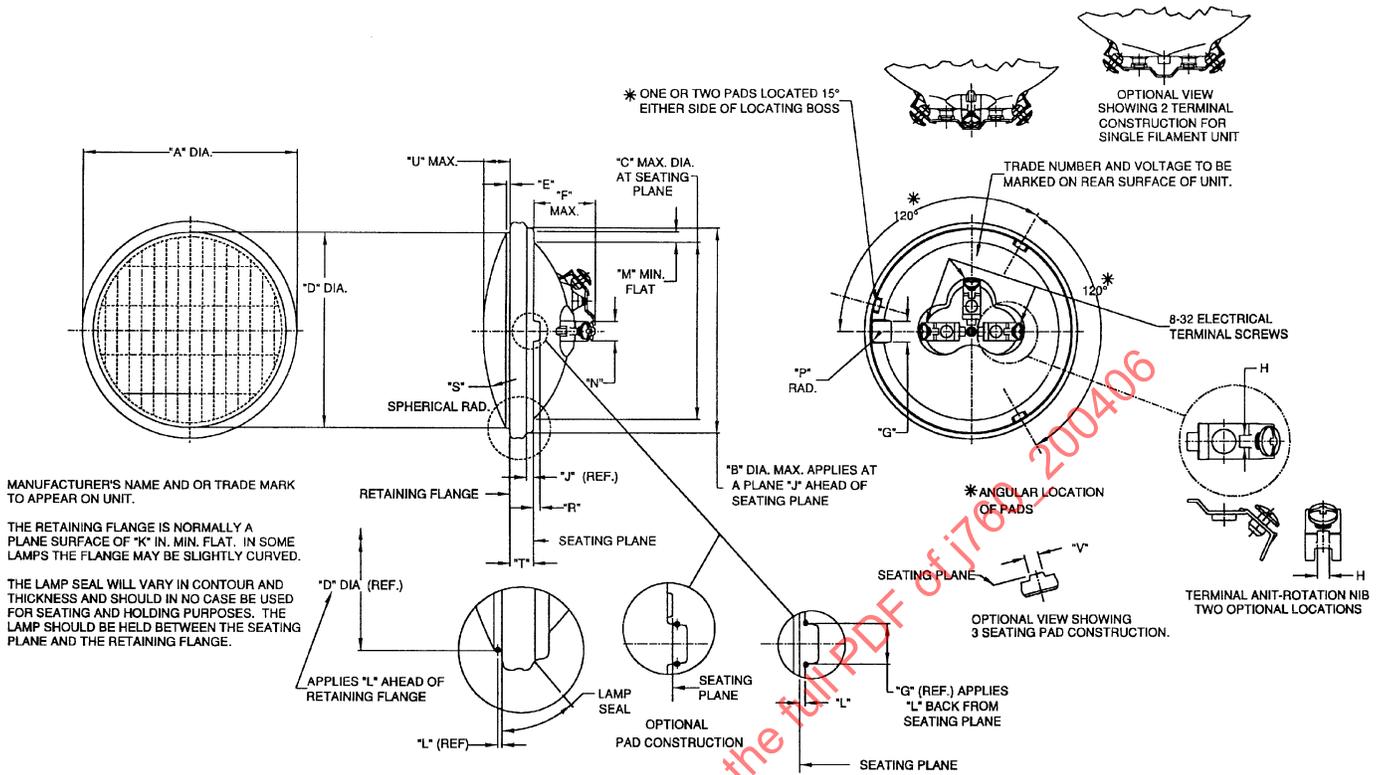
DIMENSIONS OF 114 mm (4-1/2 in) DIAMETER SEALED LIGHTING UNIT
